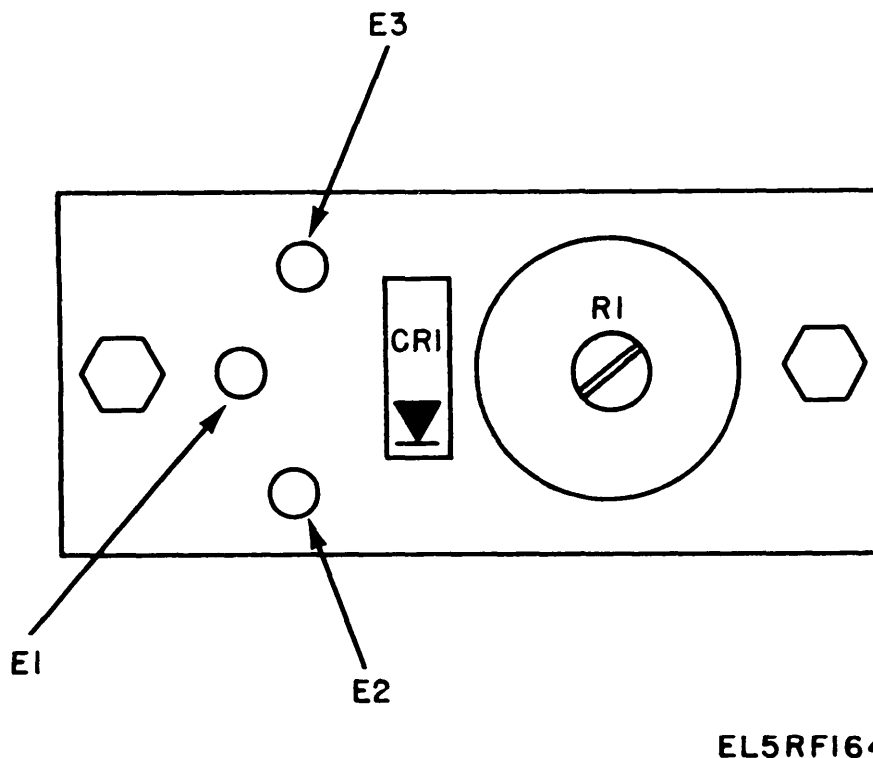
Circuit Card Assembly 1RE1A1A3, Parts Location.
